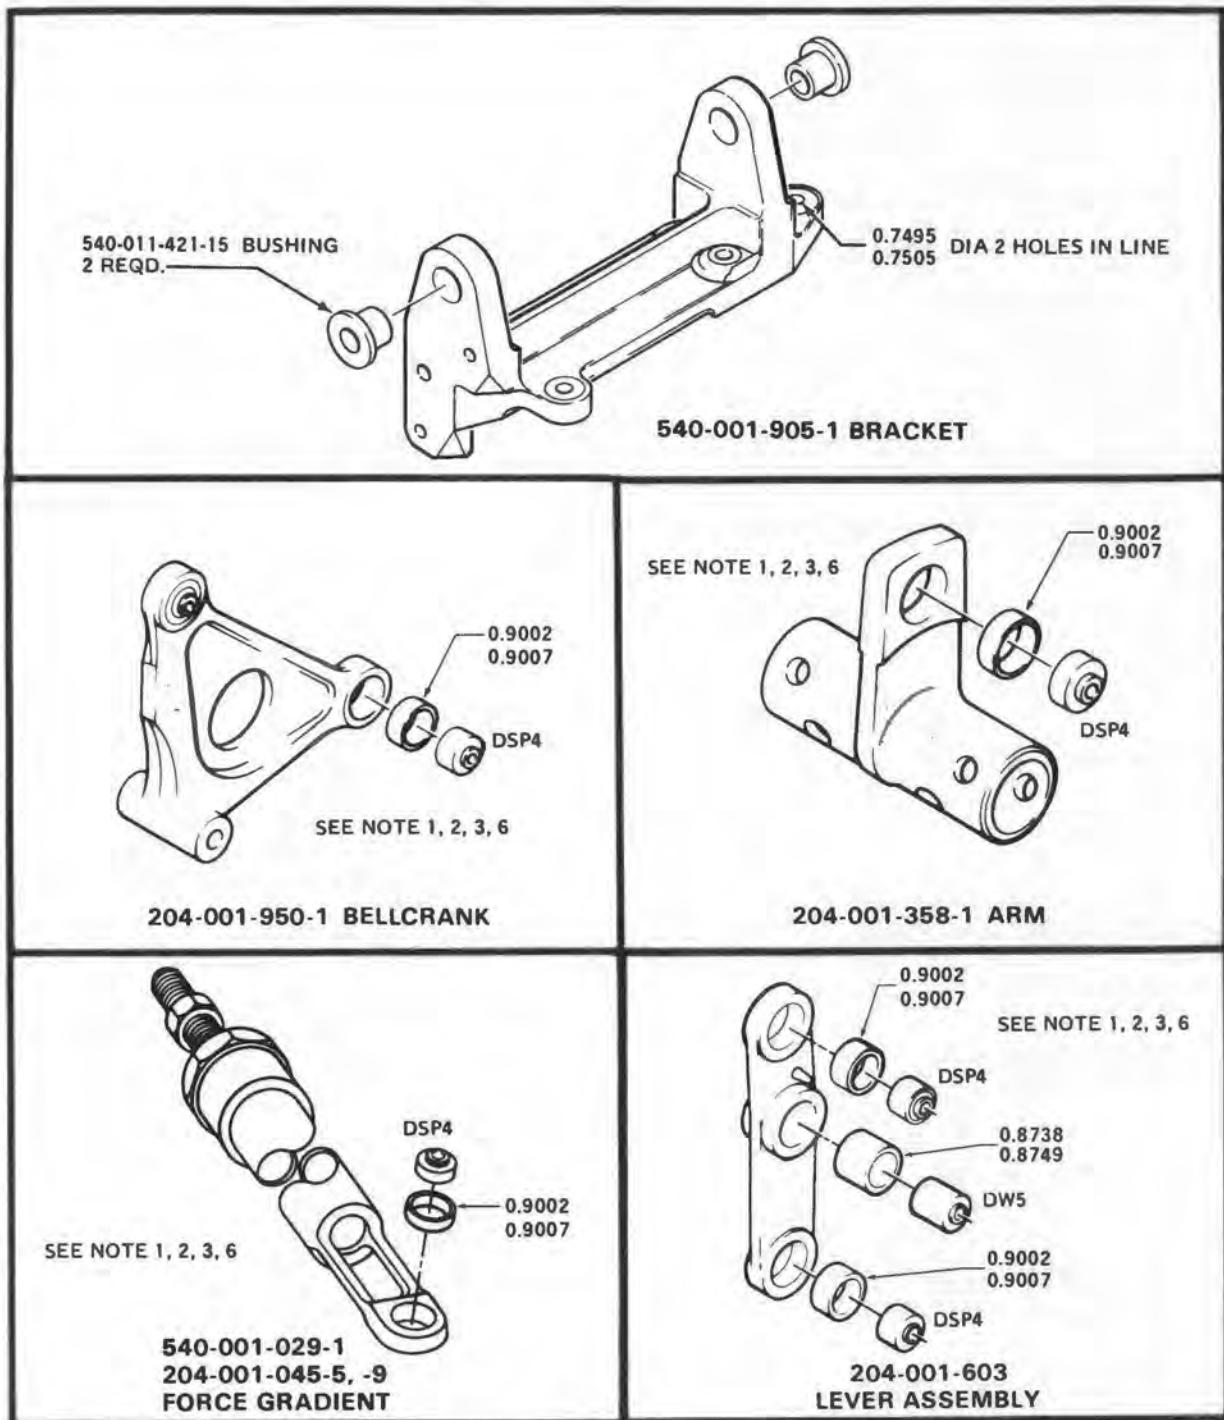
Bearing replacement (Sheet 4 of 7)
